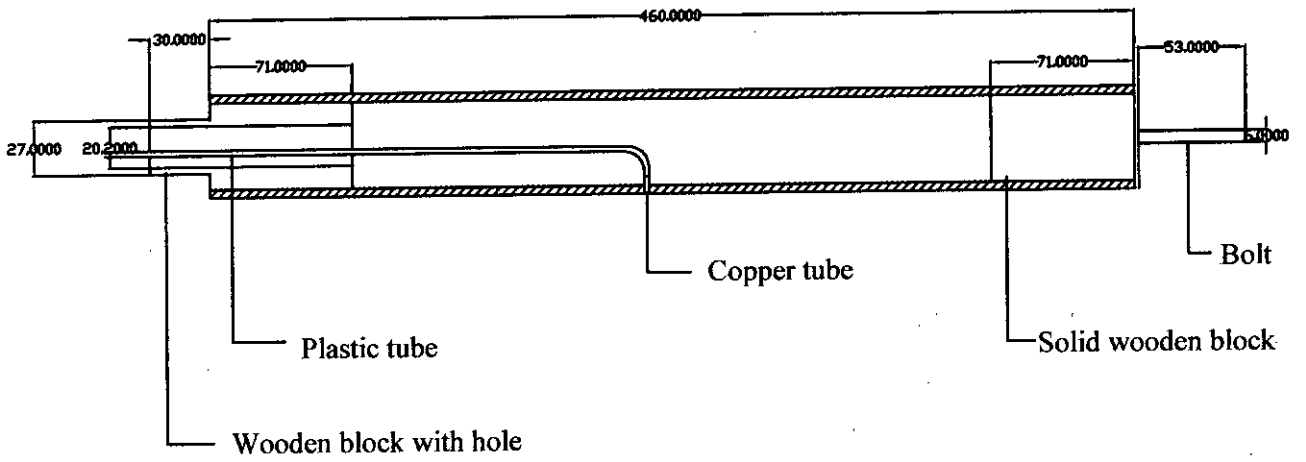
Sectional view of a specimen rectangular cylinder.
